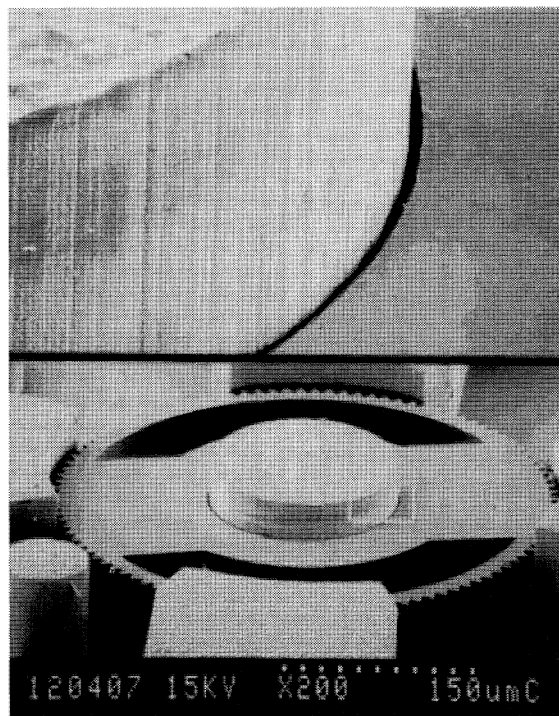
The assembled shaft-rotor combination exhibits submicron clearances.
